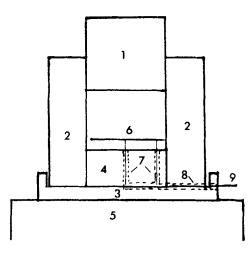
Cross-sectional view of PMMA punch and die assembly. 1) Top punch (shown raised for clarity), 2) Die, PMMA punch and die assembly holder, 4) Bottom punch, 5) Bottom ram of Carver Press, 6) Tungsten wire sensor (planar coil), 7) Bottom punch exit ports, 8) Die and for wire, 9) holder exit ports Shielded four wire cable to DMM.
